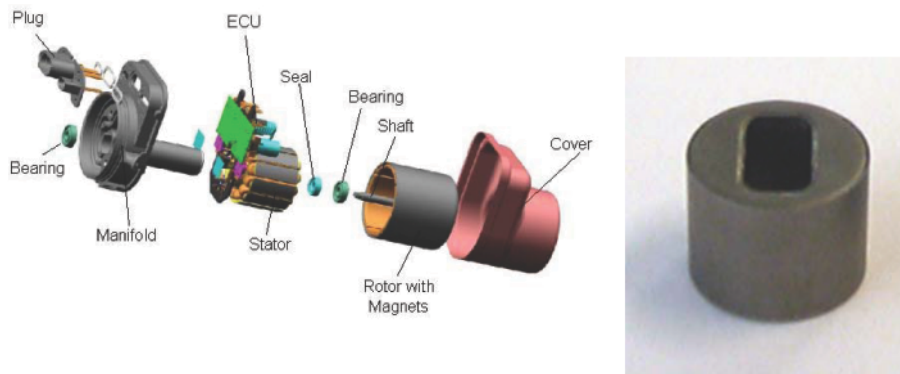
Exploded drawing of the electrical motor that drives the gear pump and Oldham joint (right).
